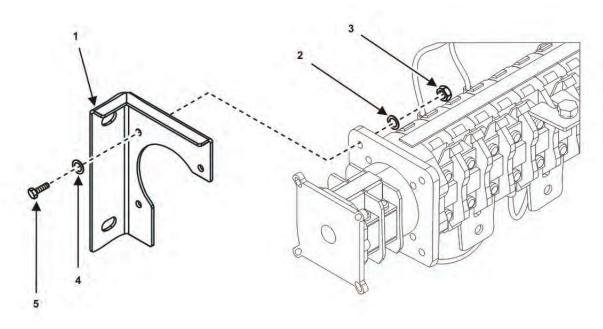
Voltage Selection Switch Mounting Bracket — Removal.
